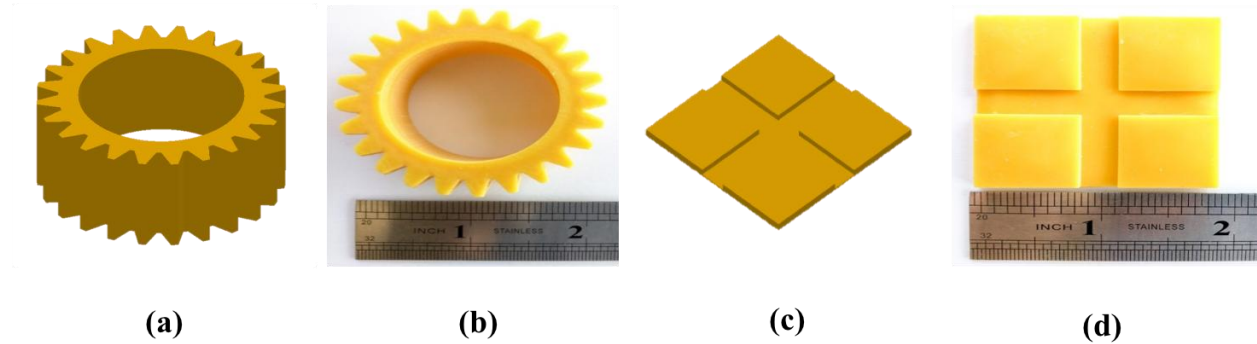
(a) CAD model of spur gear; (b) fabricated gear; (c) CAD model of cube array, (d) fabricated cube array
